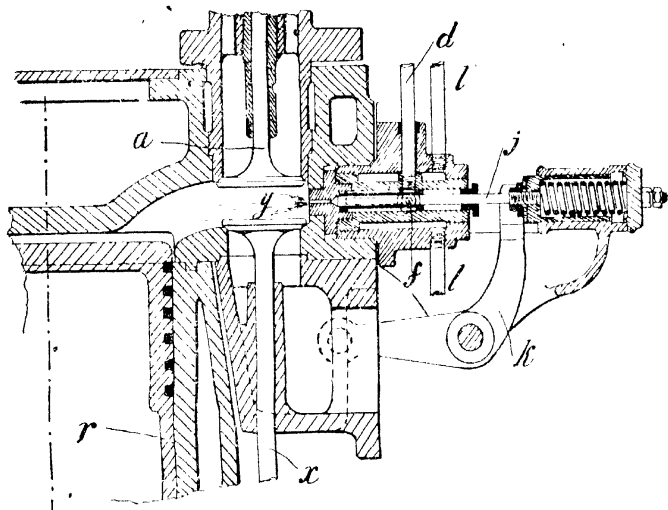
Cross sectional elevation of cylinder, showing details of air, exhaust, and fuel-injection valves used on the American-Diesel residual-oil engine with compressed air, fuel injection atomiser.
